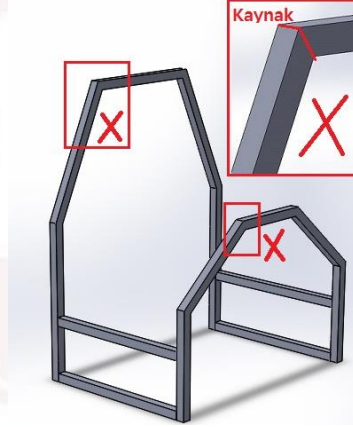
Roll Bar/Roll Cage welding joint point examples.
